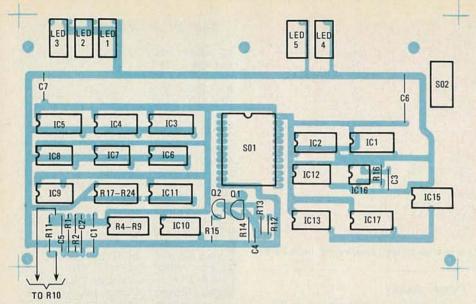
SOCKET SO1 is a 24-pin zero-insertion-force socket used to hold the 2716 EPROM. Zeroinsertion-force sockets allow IC's to be inserted and removed many times without causing wear or damage to either the socket or the IC.
